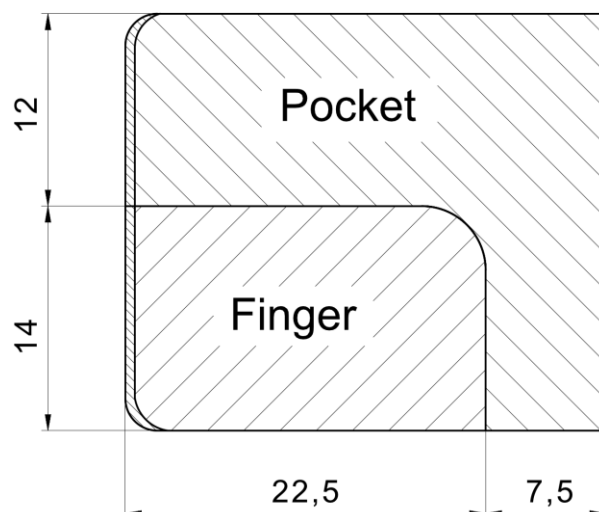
Cross-section of the original piston ring design in the ring lock area and its main dimensions
